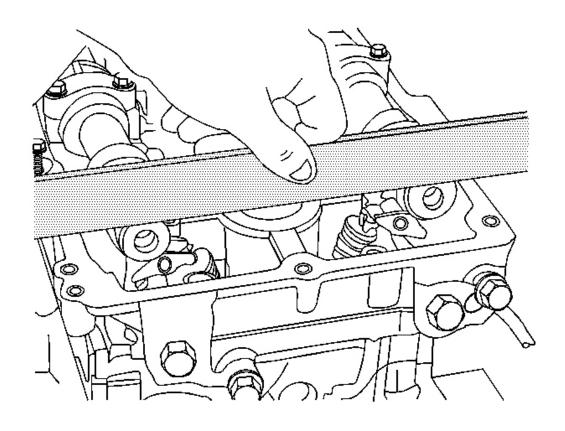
Checking For TDC Position Courtesy of GENERAL MOTORS CORP.
